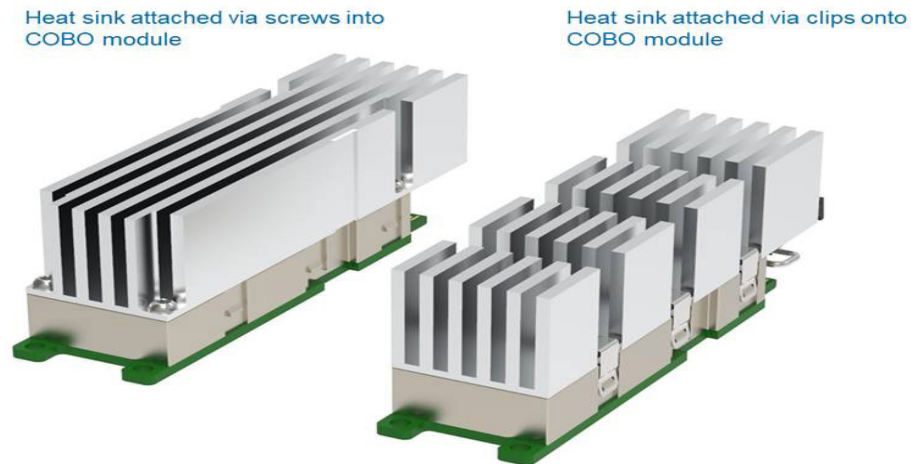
EXAMPLE HEAT SINK ATTACHMENT OPTIONS FOR CLASS C x8 MODULES
